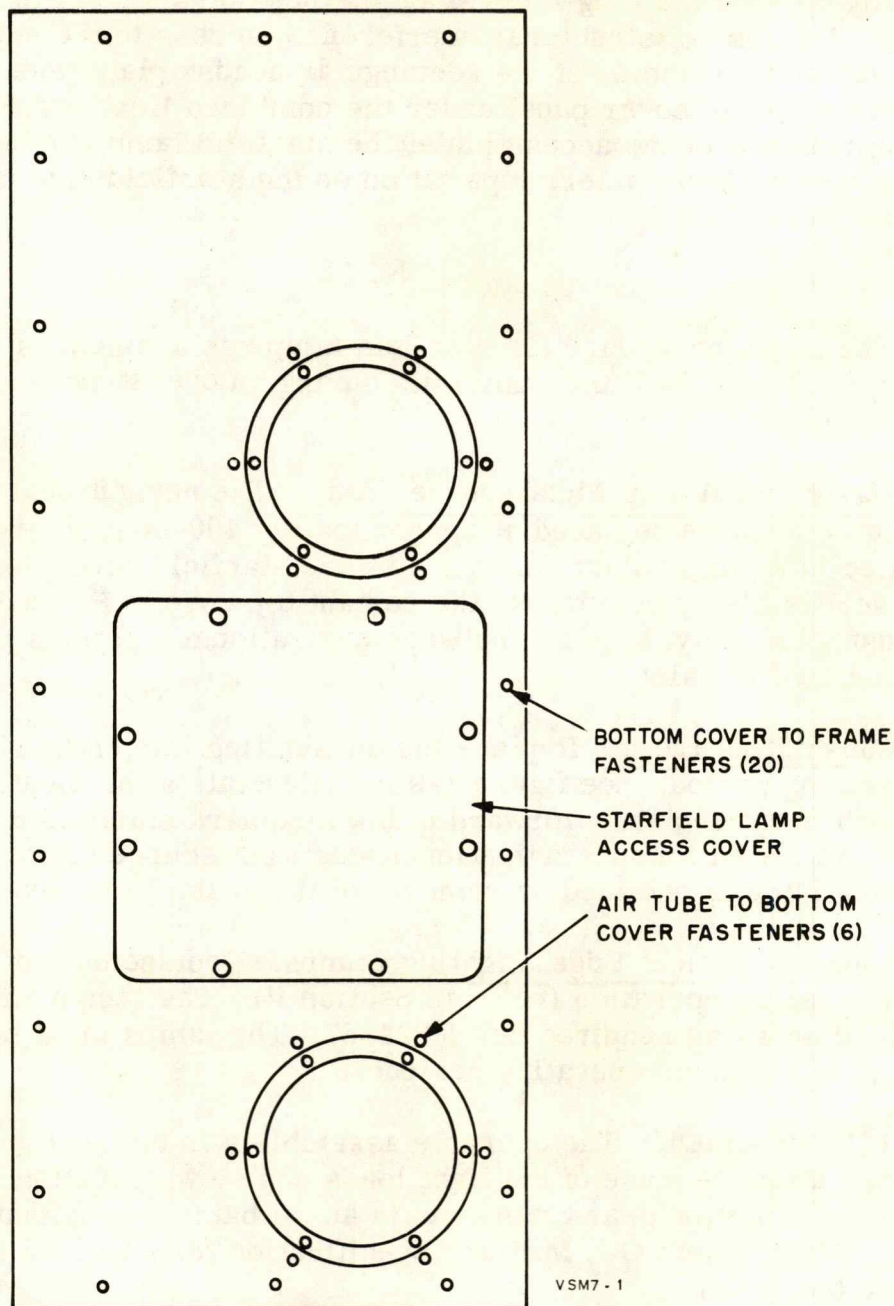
Frame Bottom Cover Panel, Below Combined Light Source
